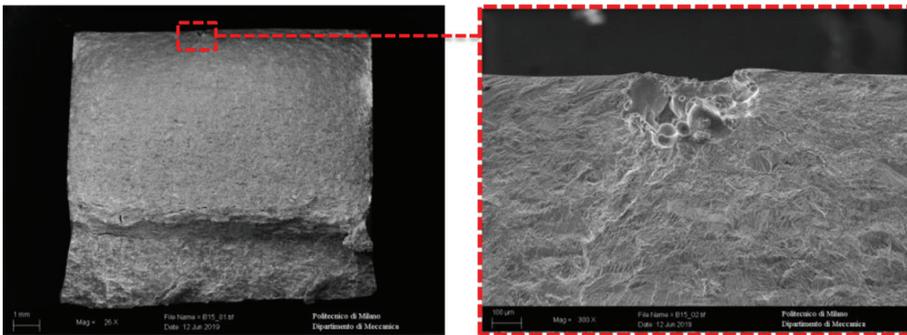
View of the fracture surface with marked spot of the crack initiation [65]
